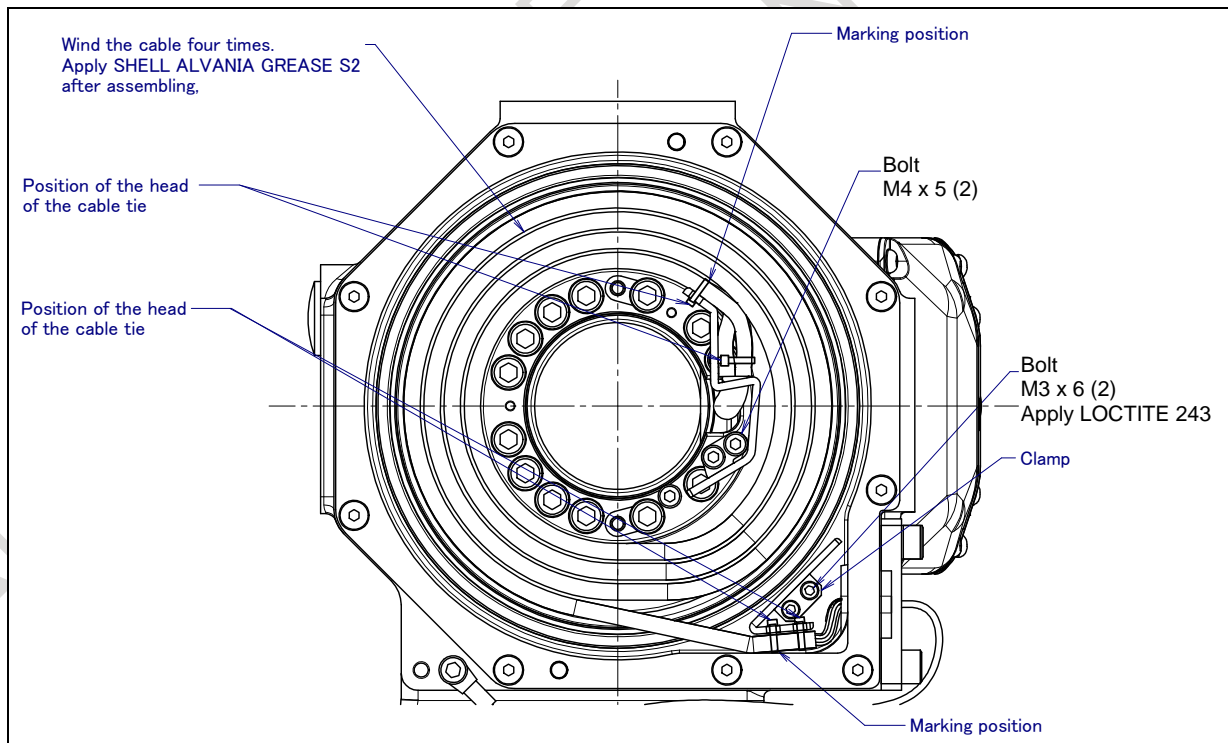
(f) Replacing cable kit (J3 casing part 2)
